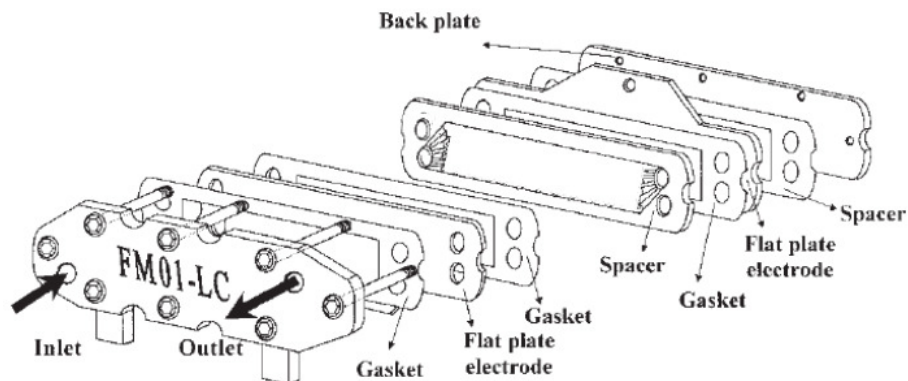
Exploded view of the *FM01-LC* laboratory cell electrolyzer [67].
